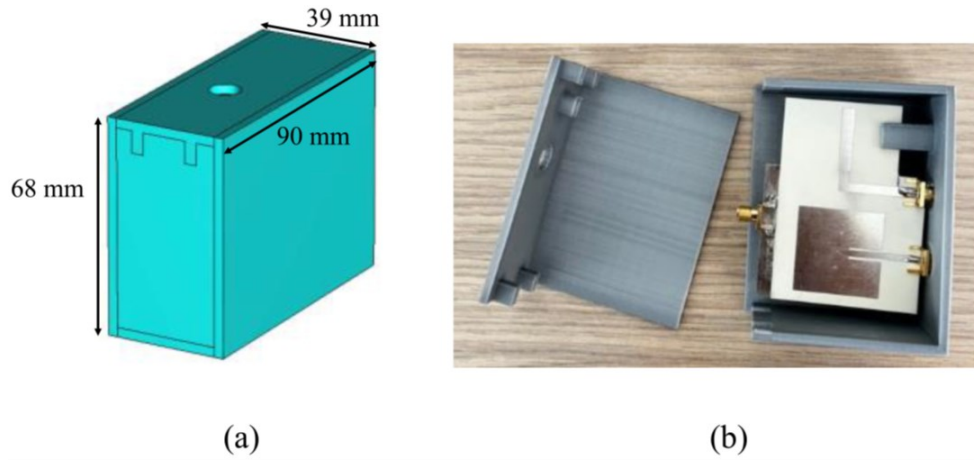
(a) 3D view of the simulated case with its dimensions, and (b) photo of take apart fabricated prototype. © 2024, IEEE
